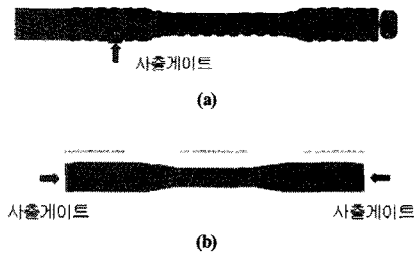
Tensile specimen (a) without weld line (b) with weld line.
